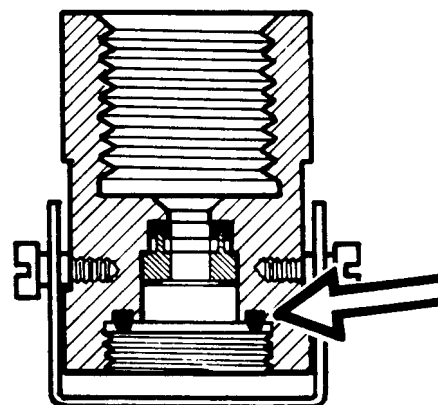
RECEIVER/ADAPTOR O-RING SEAL
